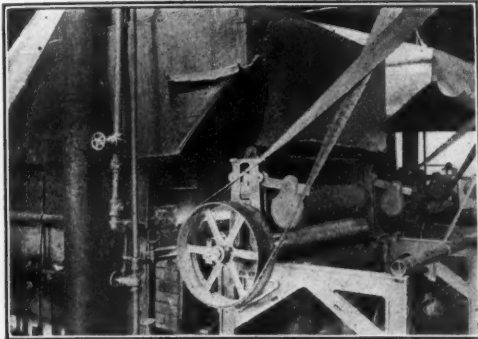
BACK VIEW OF CRUDE OIL SINGER, SHOWING BURNERS TO EXTREME LEFT AND WATER TROUGH BELOW ROLLERS.
